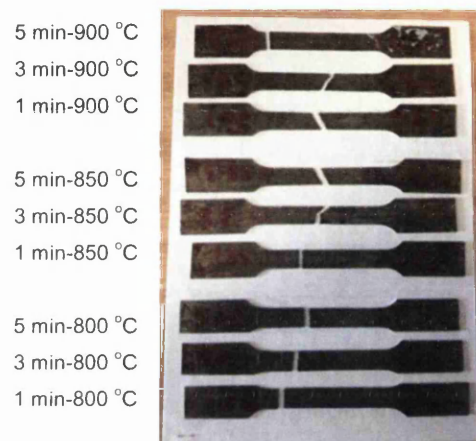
38MnB5 fractured tensile specimens illustrating change of fracture mode
